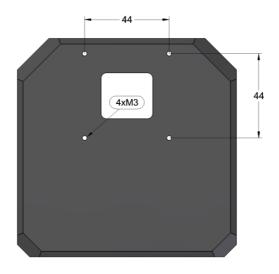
M3 threaded holes, used to mount the EFW, on the C2 camera head
